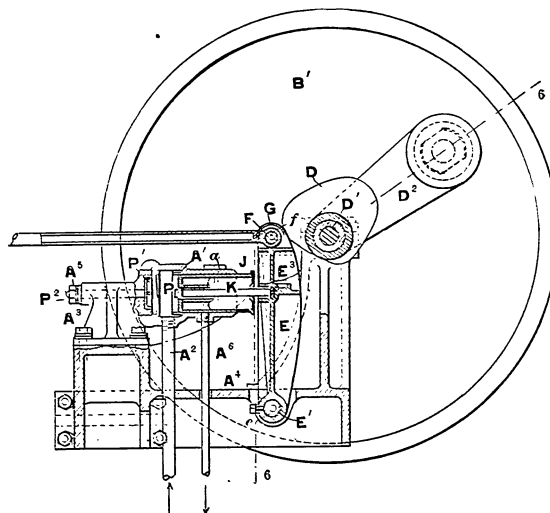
Sectional Side Elevation of Cam and Connected Parts.
